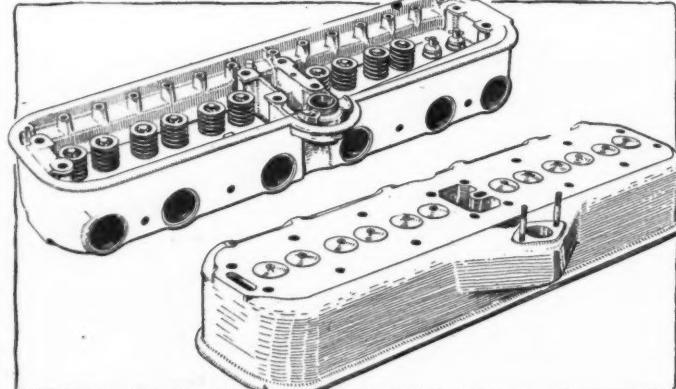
Premier Weideley detachable cylinder head. The upper view shows the top and the lower one the under side of the head
